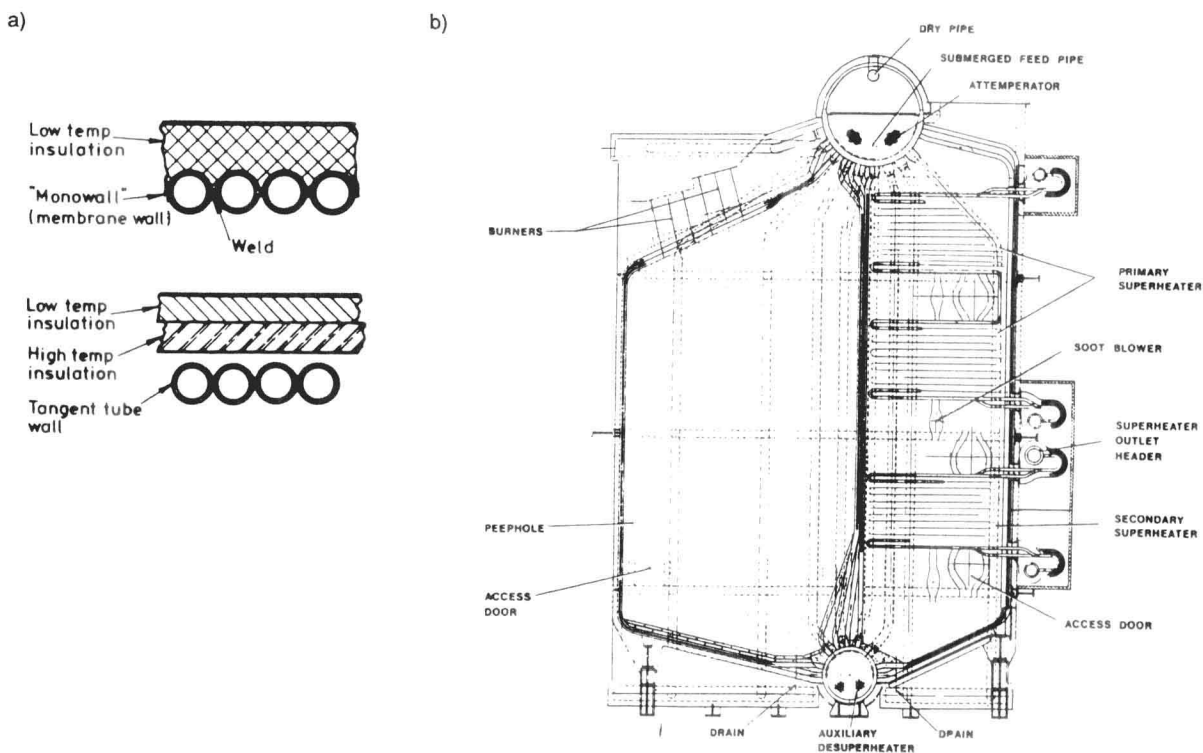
Foster Wheeler ESD III type boiler: a) alternative furnace tube arrangements; b) later type showing mono-wall construction.
